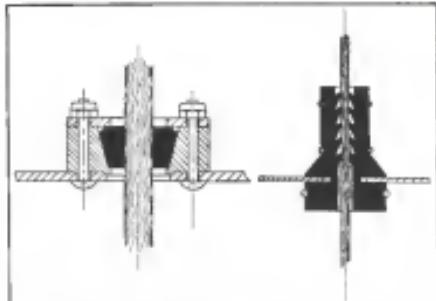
Cable seal gaskets. Fine development is seen at left. Newer and (right) methods is simpler to install, and has lower cable friction.
